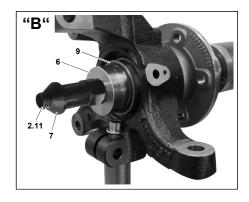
Slide on wheel hub. Mount pressure ring and retaining adaptor. Screw on clamping nut.
